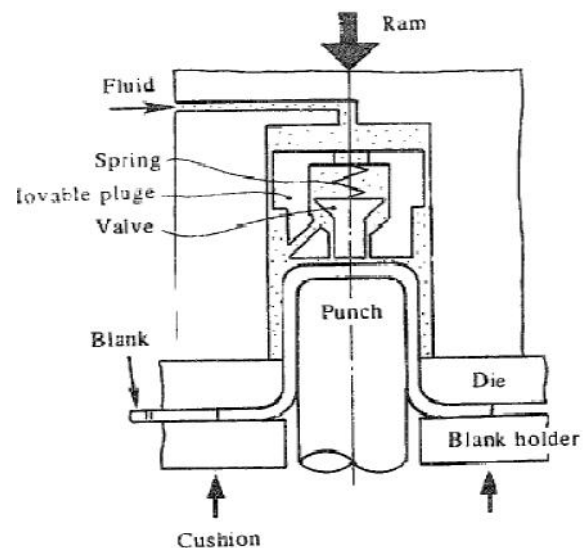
Hydraulic Counter Pressure Deep Drawing
